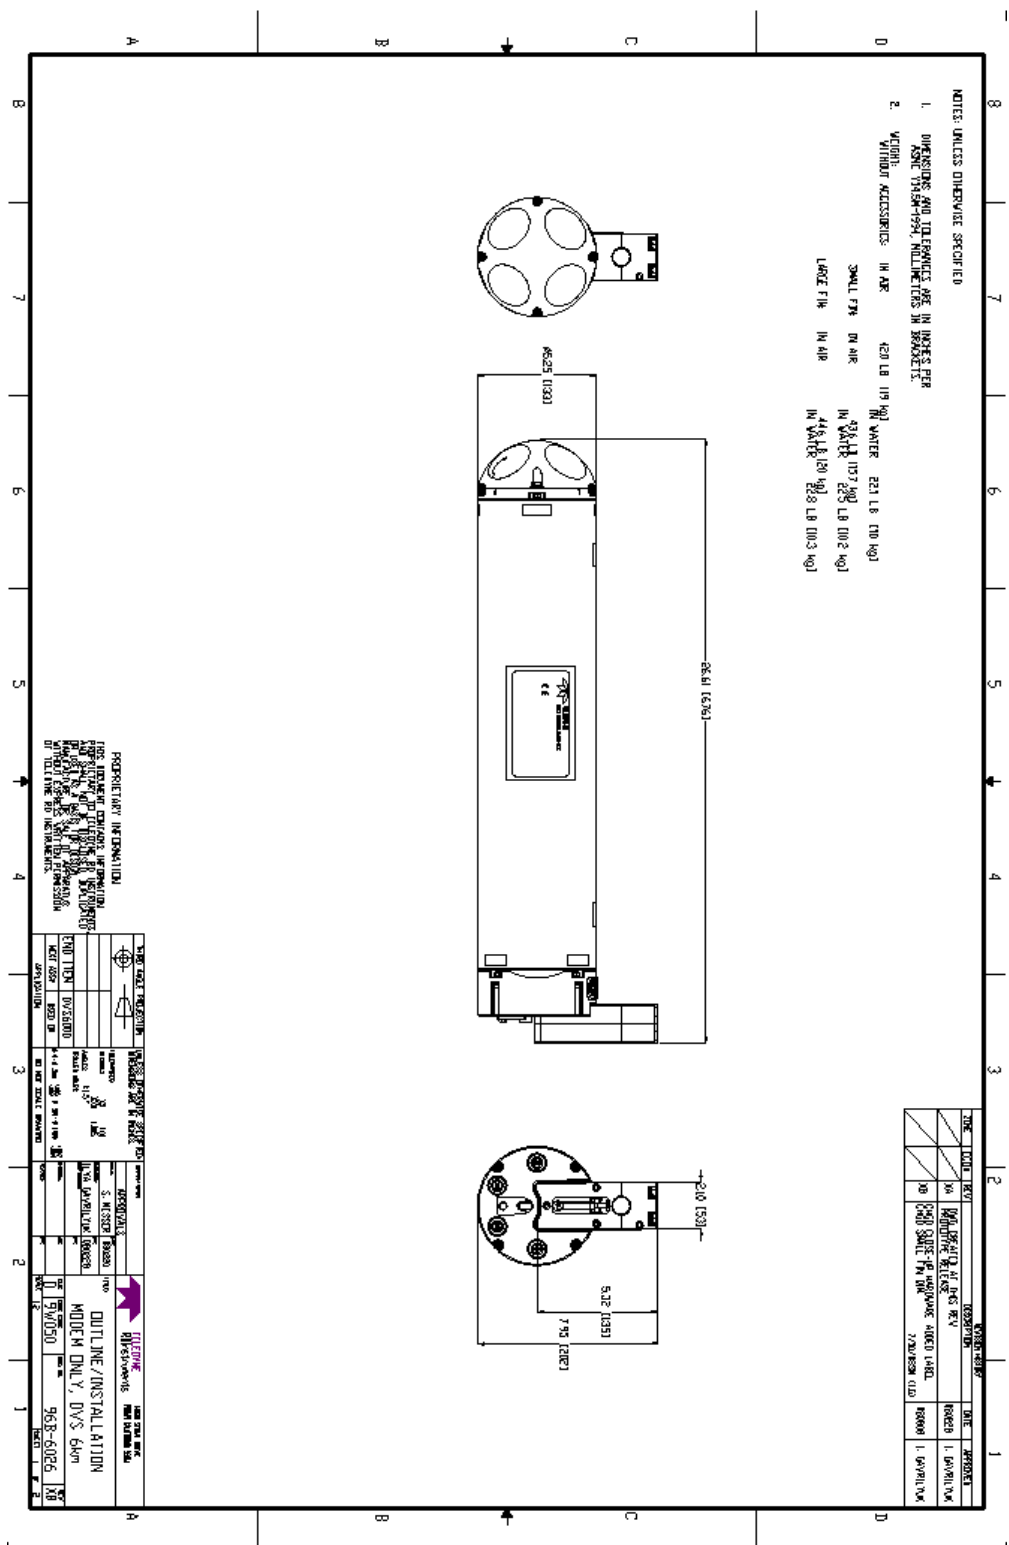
Outline Installation Drawing 96B-6026 Sheet 1
